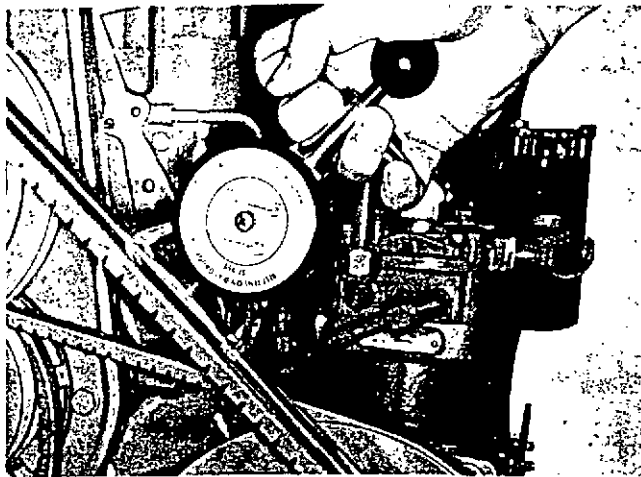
, N11955. Checking belt tension with ST-968 Gauge
